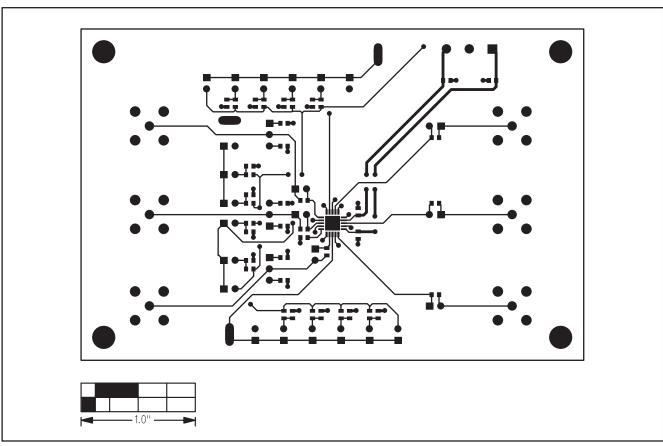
MAX7438 EV Kit PC Board Layout—Component Side
